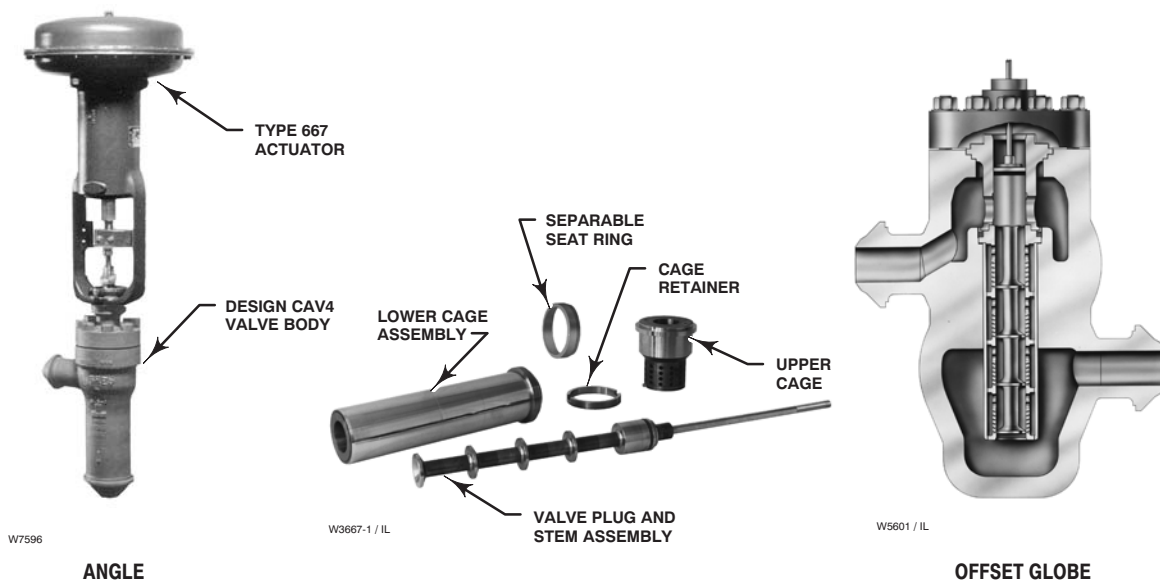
Type 657-CAV4 Control Valve Assembly with Cavitol® IV Trim
